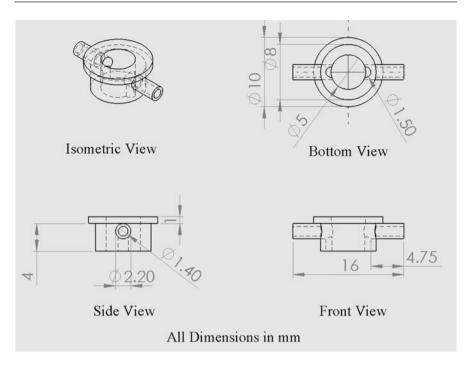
Different views of improved bush / sleeve, used in dental drill guide
